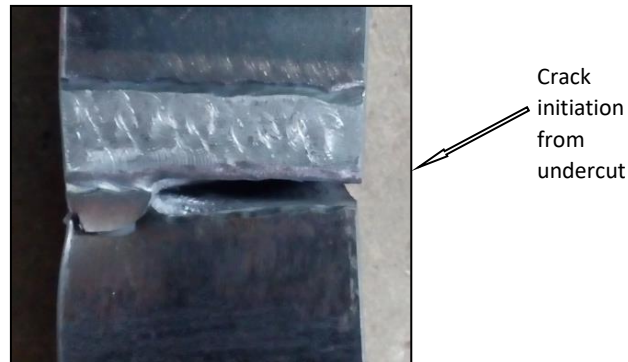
Cracks of JT 2-2 test specimens due to fatigue failure, initial cracks from undercut
